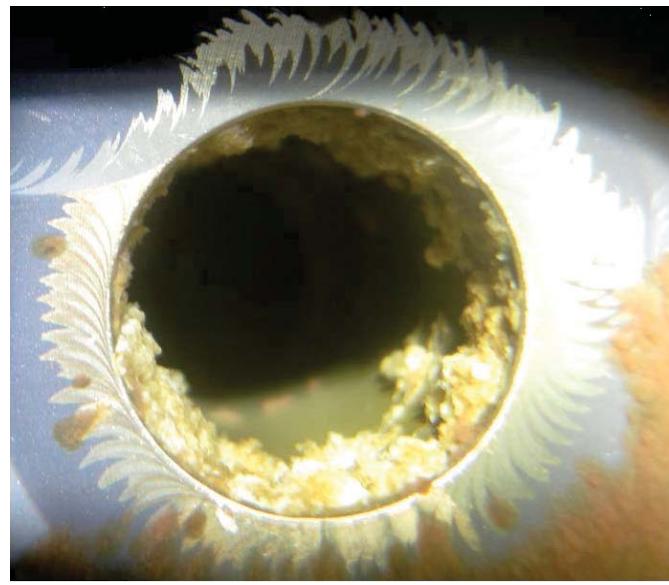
Close up of a single tube of a TFSW coupon exposed to 674m deep seawater for 1.5 years.
